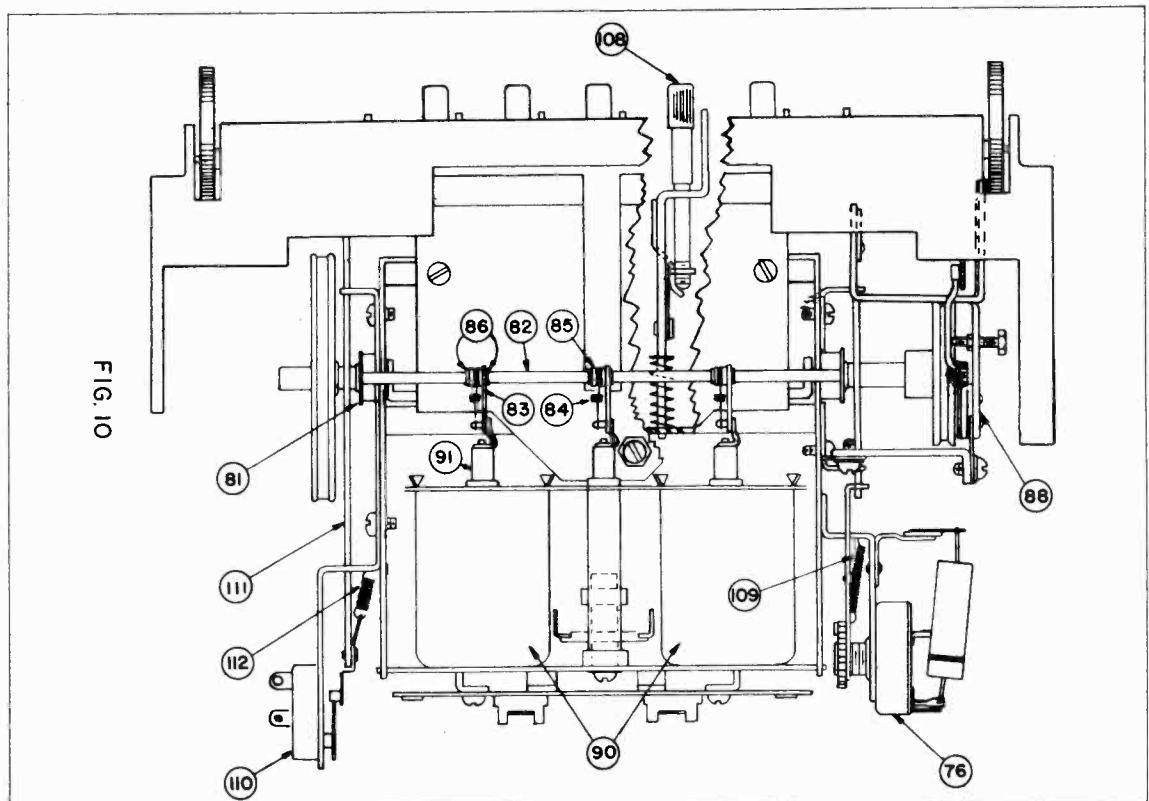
Parts Layout - Tuner Unit - Bottom View
